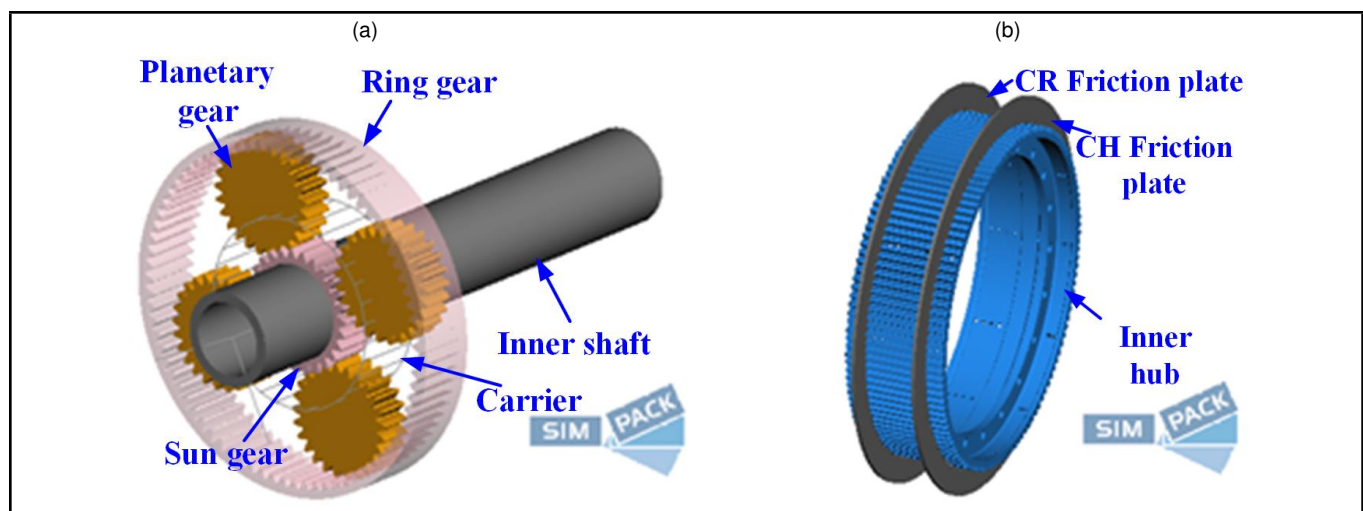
Three-dimensional model of the first-row planetary gears. (a) Gears, (b) CH, CR friction plates and inner hubs.
